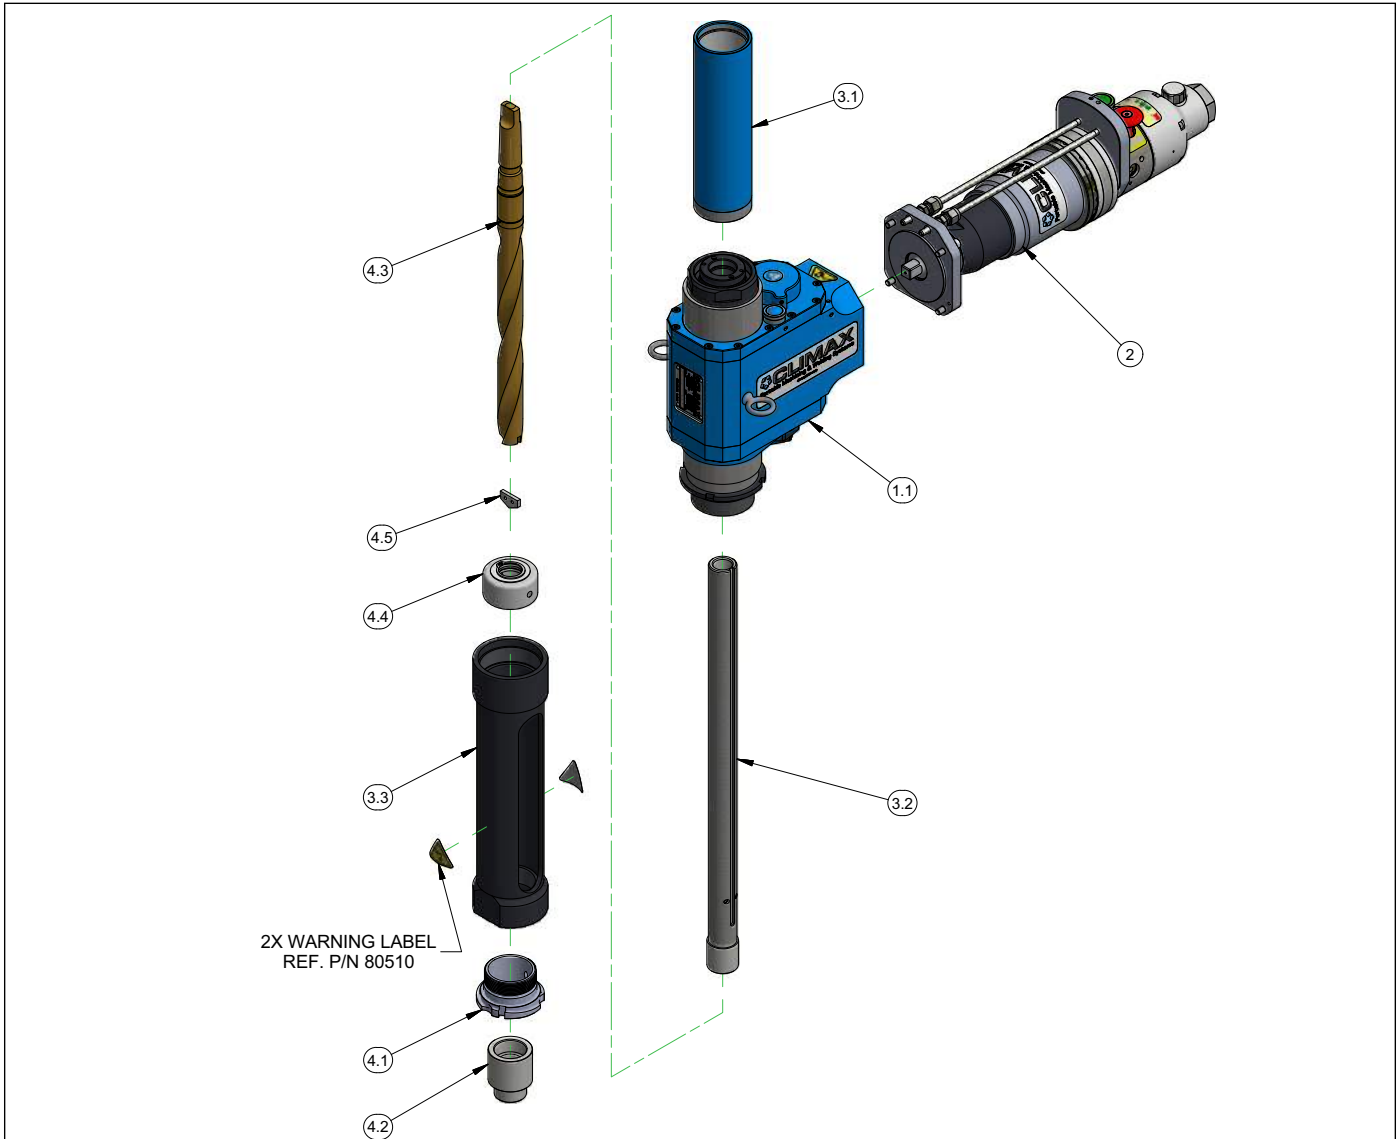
SUB-ASSEMBLY COMPONENTS
